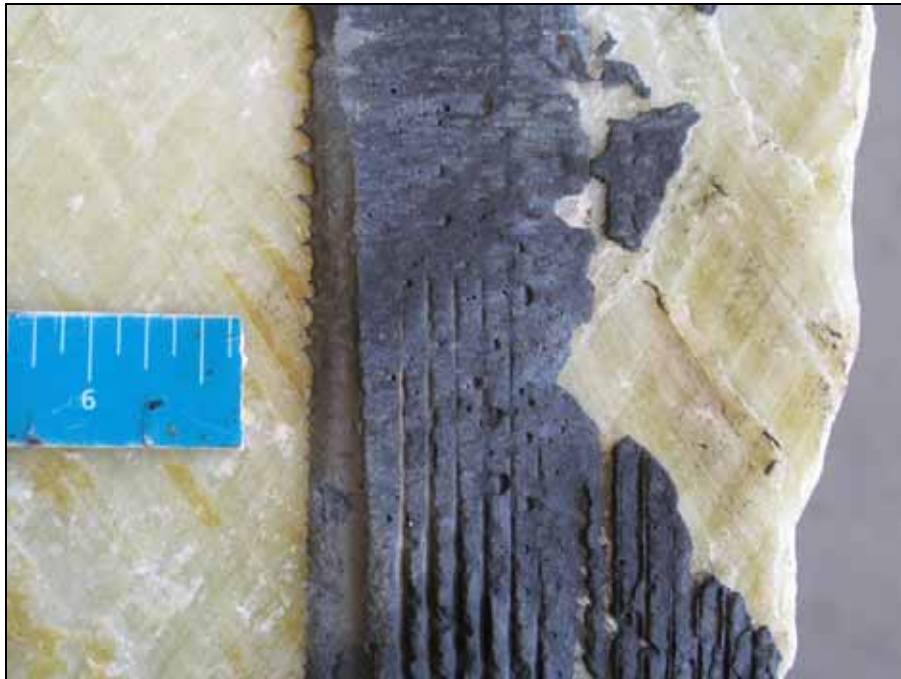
Failed 6' Pup: Bottom Closer-Up View. Note Thread Wear
